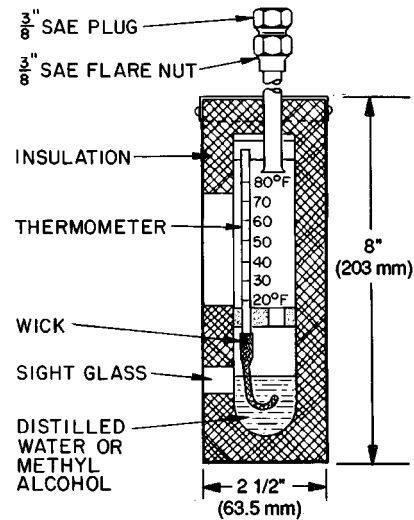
Typical Wet-Bulb Type Vacuum Indicator
